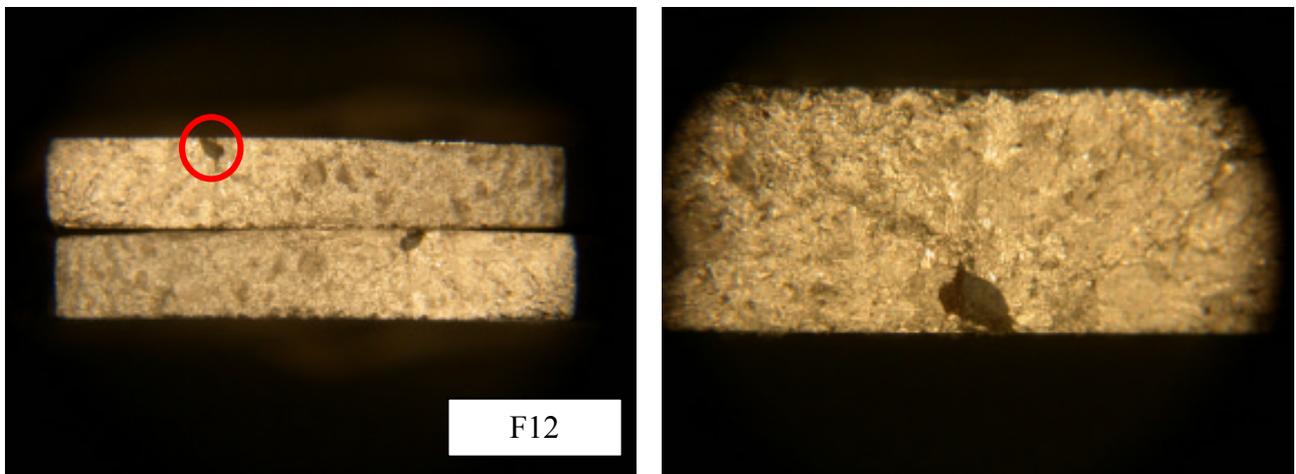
Evidence of defects, due to micro casting, in A357 material.
